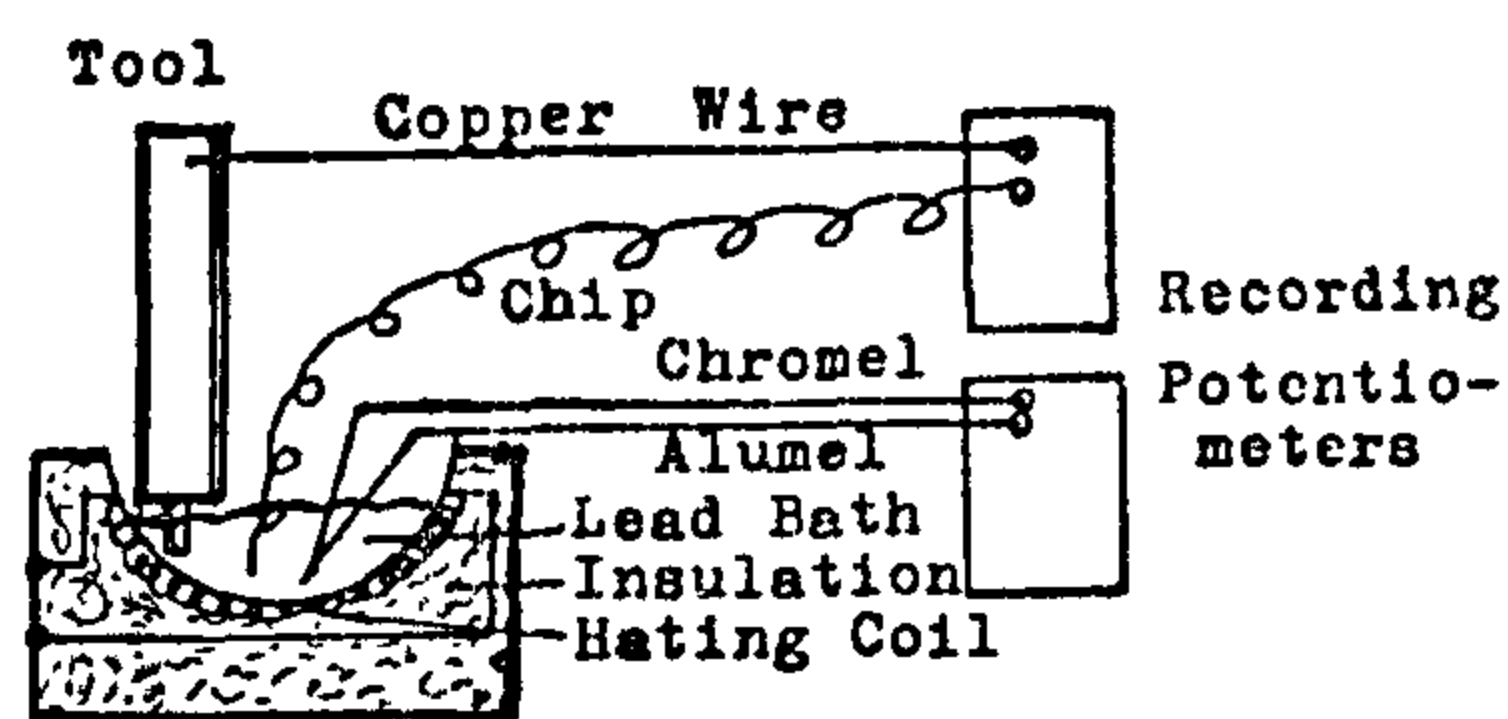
Tool-Work thermocouple arrangement on a lathe.
